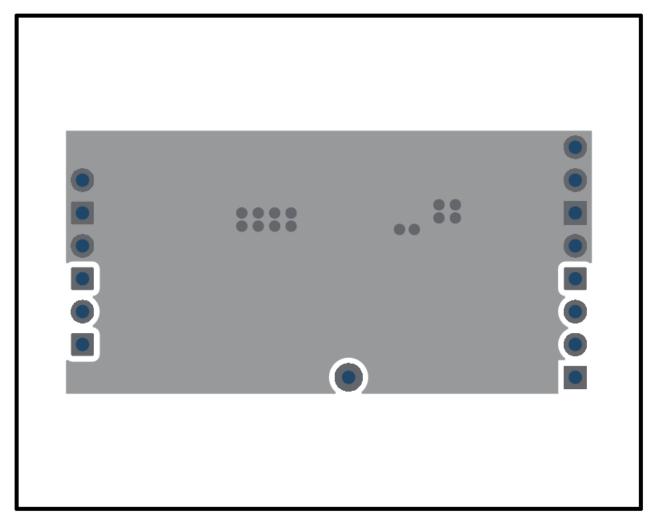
TPS61322EVM-001 Bottom-Side Layout
